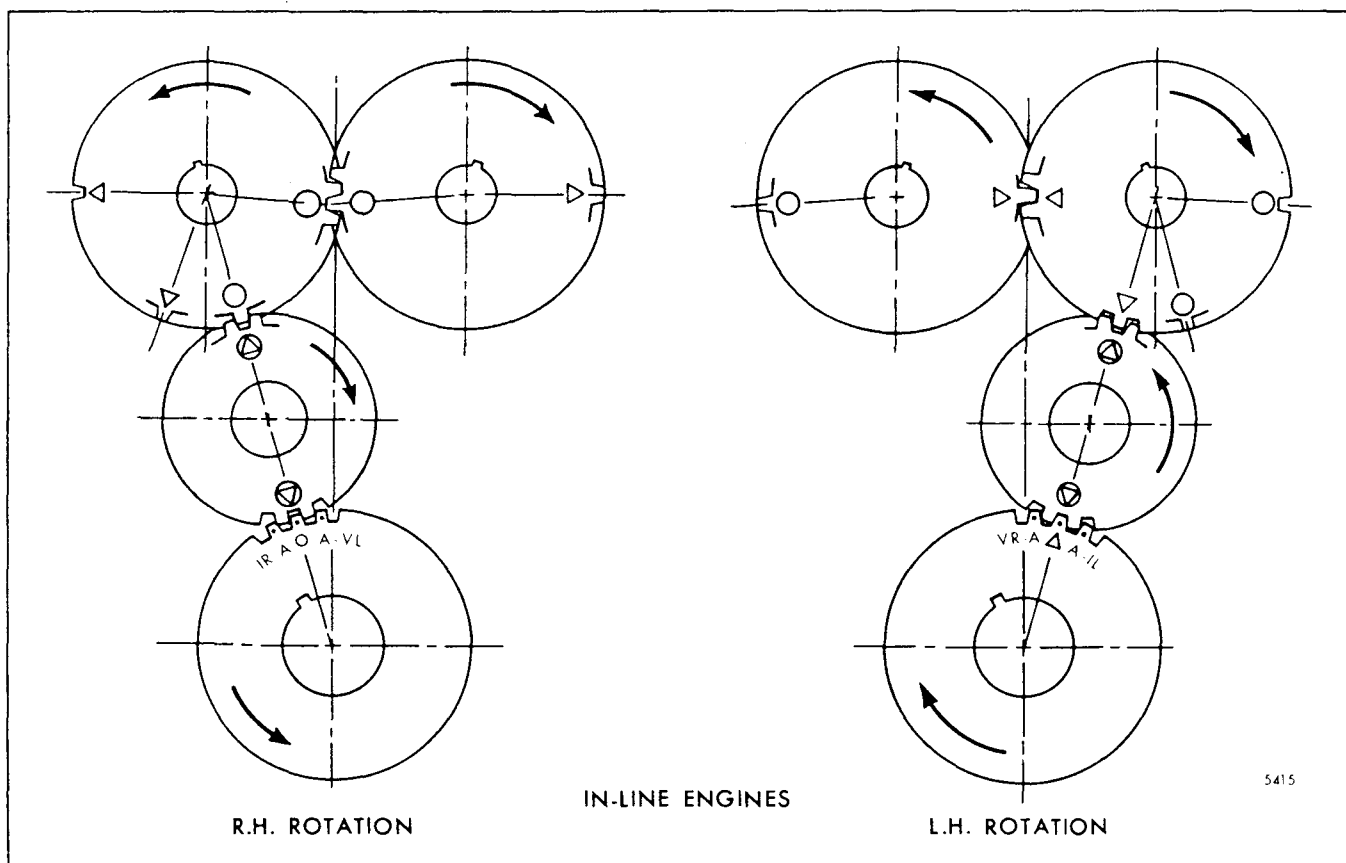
In-Line Engine Gear Train Timing Marks (Standard Timing Shown)
